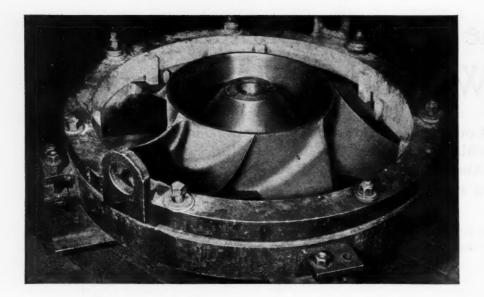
High-speed Fan and Jig Especially Designed for Use in Welding It
